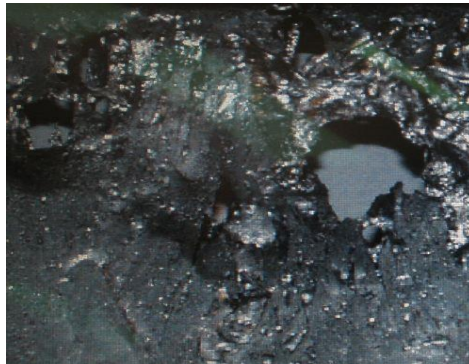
Al_2O_3 particles on the fracture surface
